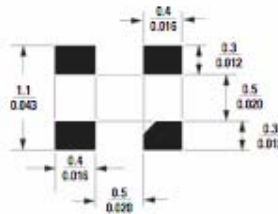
PCB Pad Print for Minipak 1412. Package (mm [inches]).
